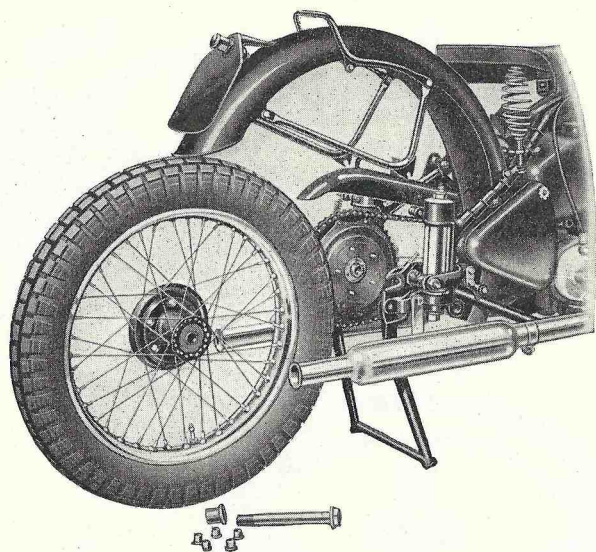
DETACHABLE REAR WHEEL SHOWN WITH PLUNGER TYPE FRAME AND THE 1951-52-TYPE REAR MUDGUARD AND STAYS.
